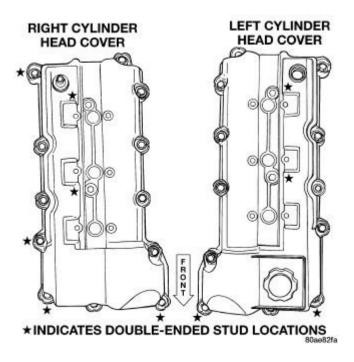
Cylinder Head Covers Courtesy of CHRYSLER LLC
